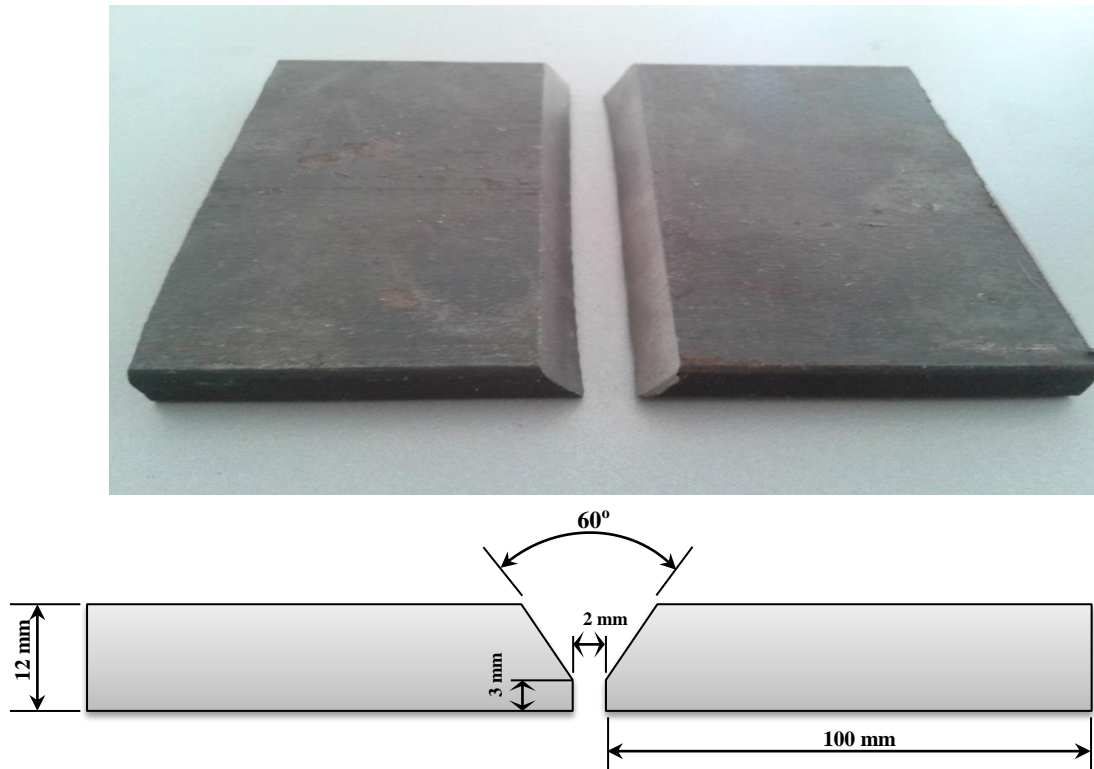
Single V groove welding dimensions according to ISO 9692 [48].
